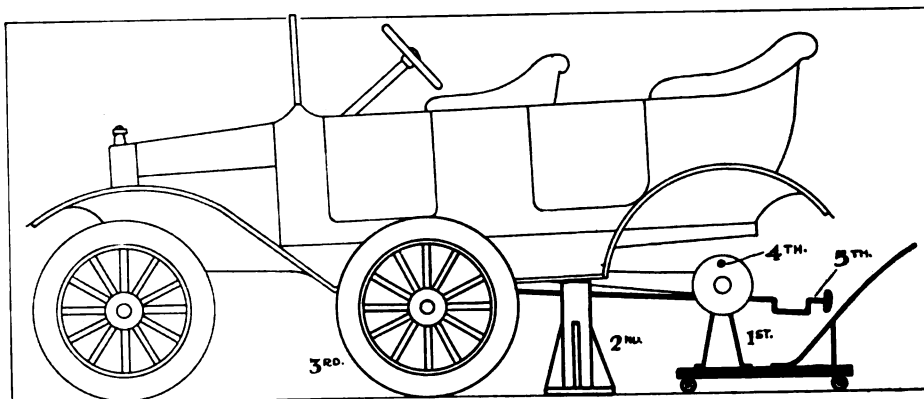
The five main steps in removing the axle. First—Quick-acting jack truck is put in place. Second—Auxiliary jack which supports car when axle is removed. Third—Rear wheels are removed. Fourth—Spring shackle nuts are removed. Fifth—Torque tube disconnected with long wrench
